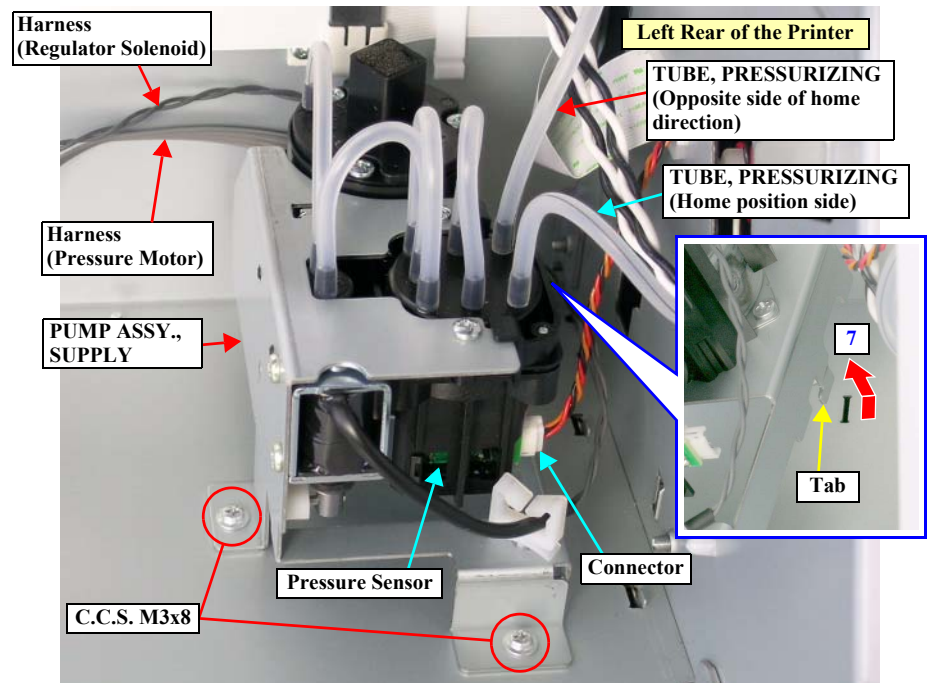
Removing the PUMP ASSY., SUPPLY
